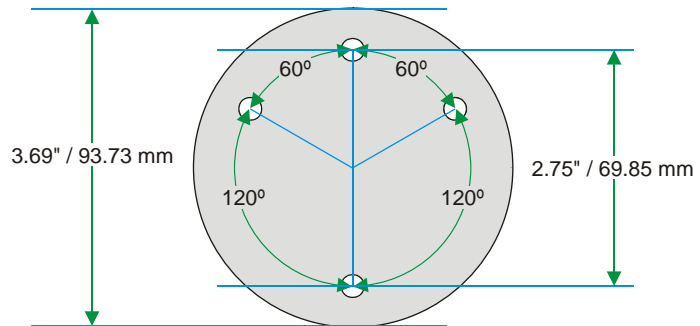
VX7 RAM Bracket - Mounting Dimensions (Not To Scale)
